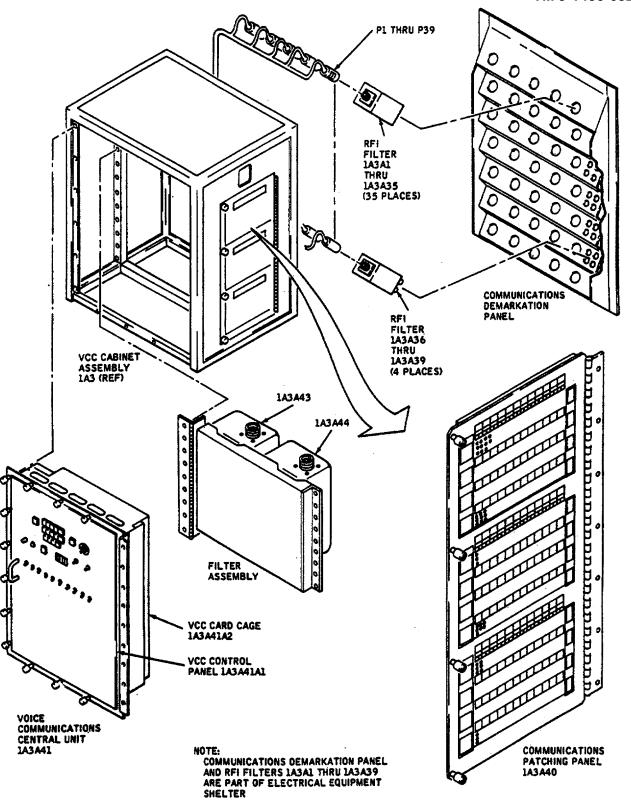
Communications Equipment, Major Units and Assemblies (Sheet 2 of 2)
